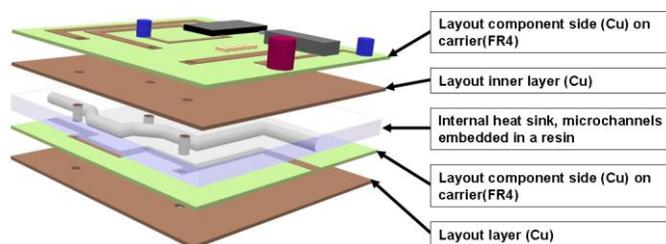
Exploded view of a four layer PCB with an embedded microchannel.
